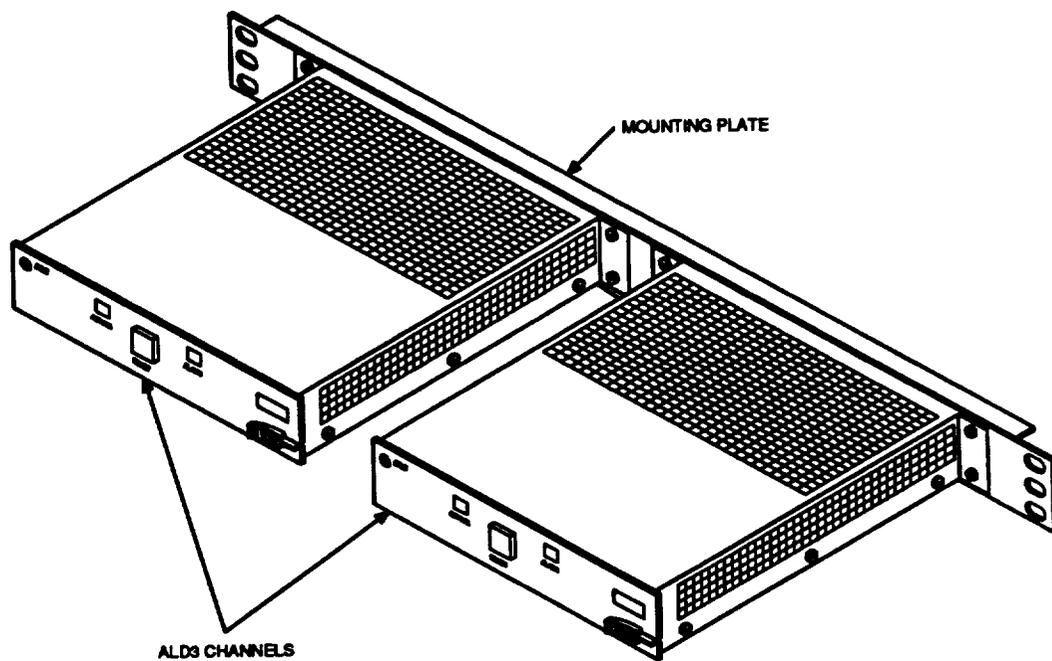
Remote Record Unit Equipped with Two ALD3 Circuit Packs
